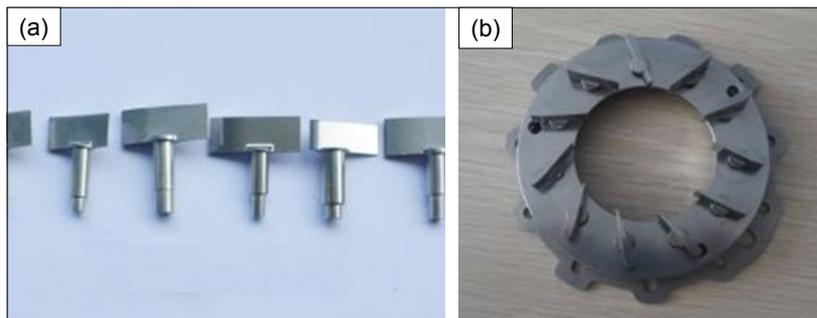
HK30 products fabricated by MIM, (a) HK30 guide vanes; (b) an assembled VGT nozzle ring [2]
